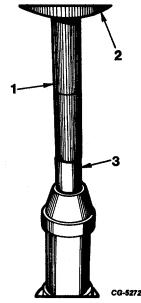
Installing Lower Bushing Using Installer SE-1955-7.
